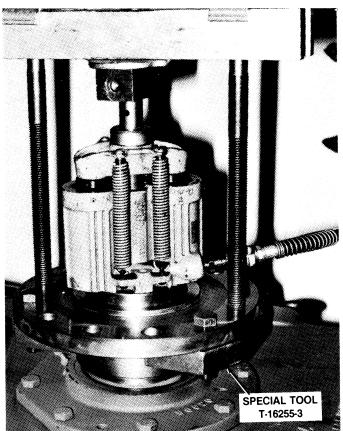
Using Hydraulic Press and Special Tool T-16255-3 to Remove Output Flange.
